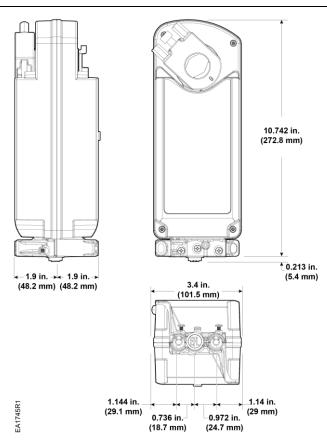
Dimensions of the OpenAir GVD/GKD Actuator in Inches (Millimeters).
